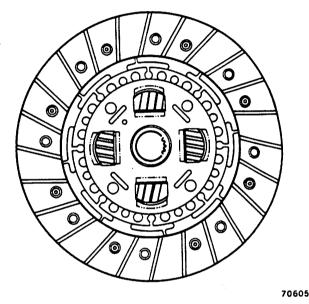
A-3 Clutch Driven Plate—Four-Cylinder CJ and Scrambler Models
